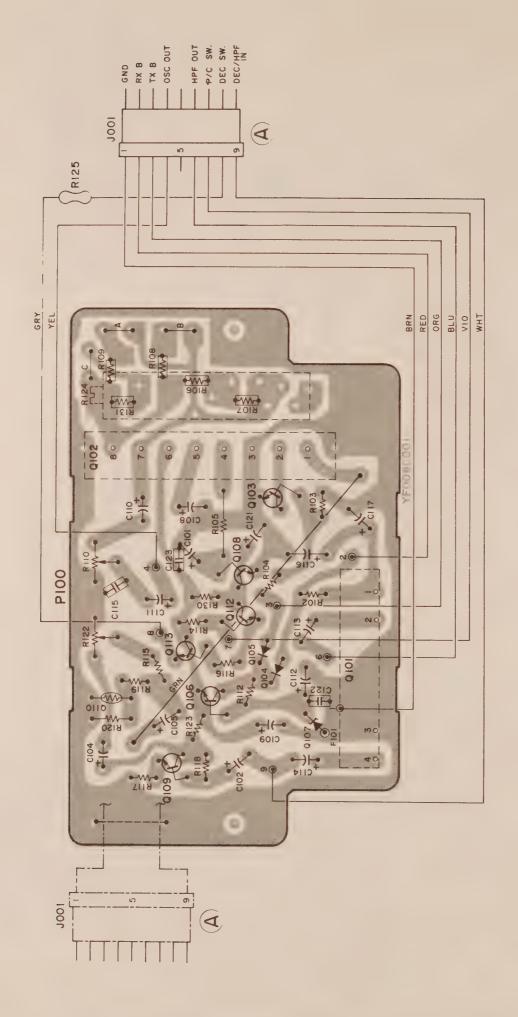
TN15M P.C. BOARD LAYOUT (FOIL SIDE WITH COMPONENT OVERLAY)
